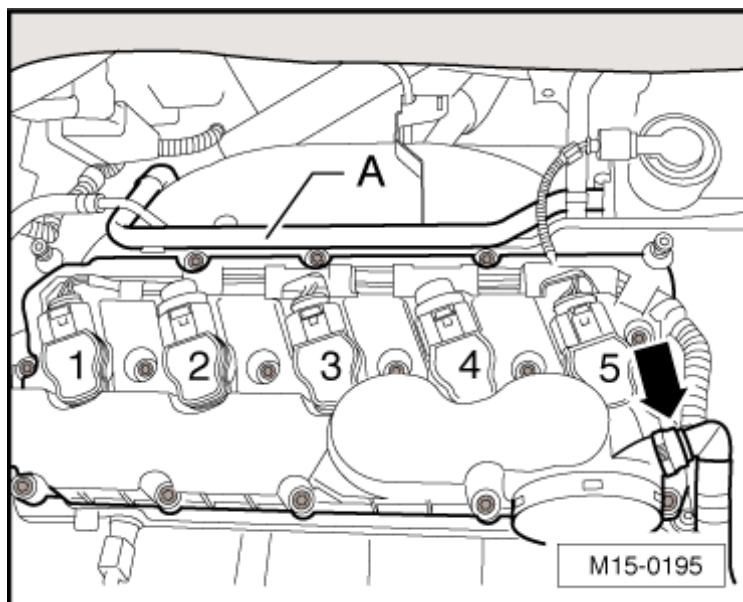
Disconnecting Air Hose Of Crankshaft Housing Ventilation
